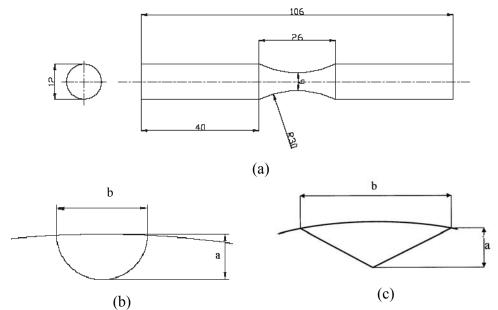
Geometry of the specimens used for the rotating bending fatigue tests, (a), geometry of hole A (a=0.125mm b=0.28mm) (b), geometry of hole B (a=0.70mm, b=340mm) (c).
